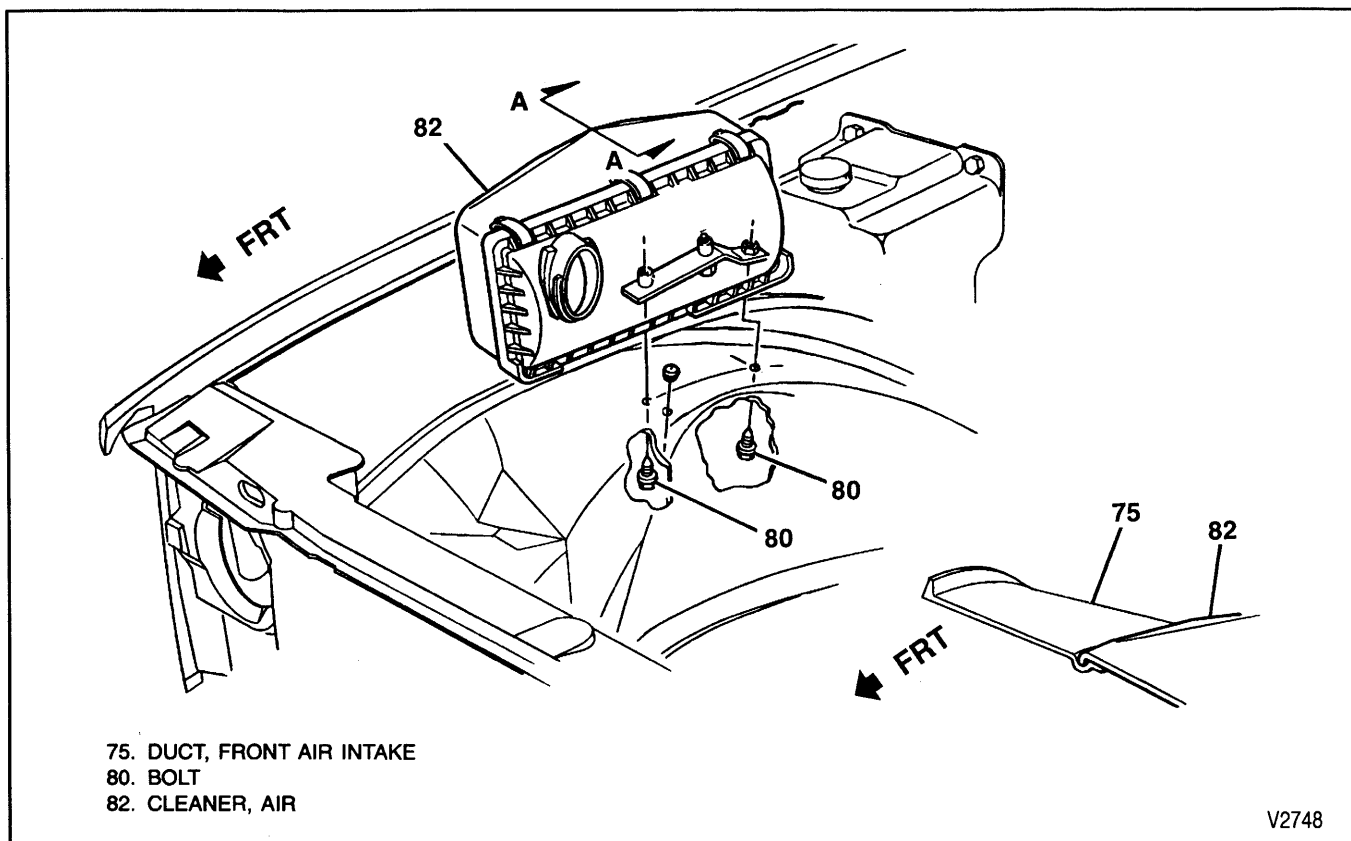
Air Cleaner Mounting (L56, VIN S and L65, VIN F)
